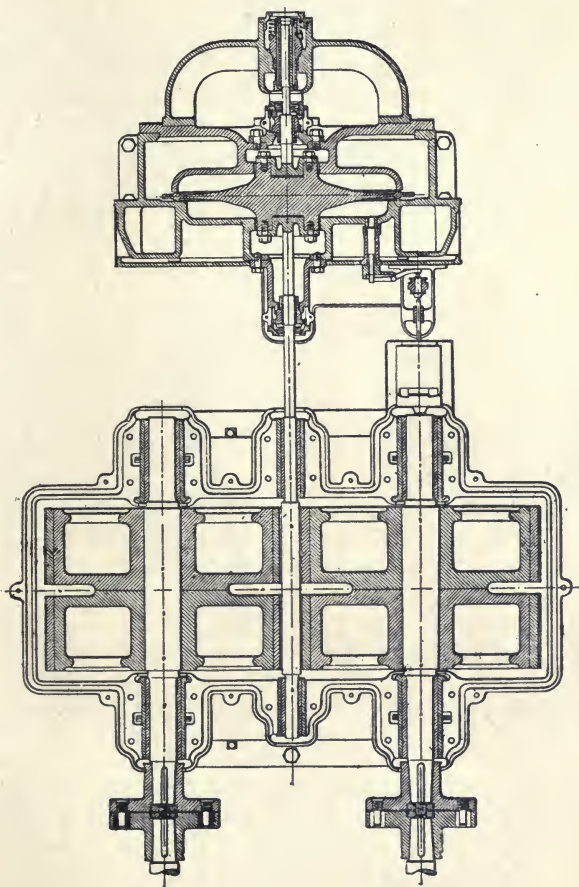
SECTIONAL PLAN OF DE LAVAL TURBINE AND REDUCING GEARS.
